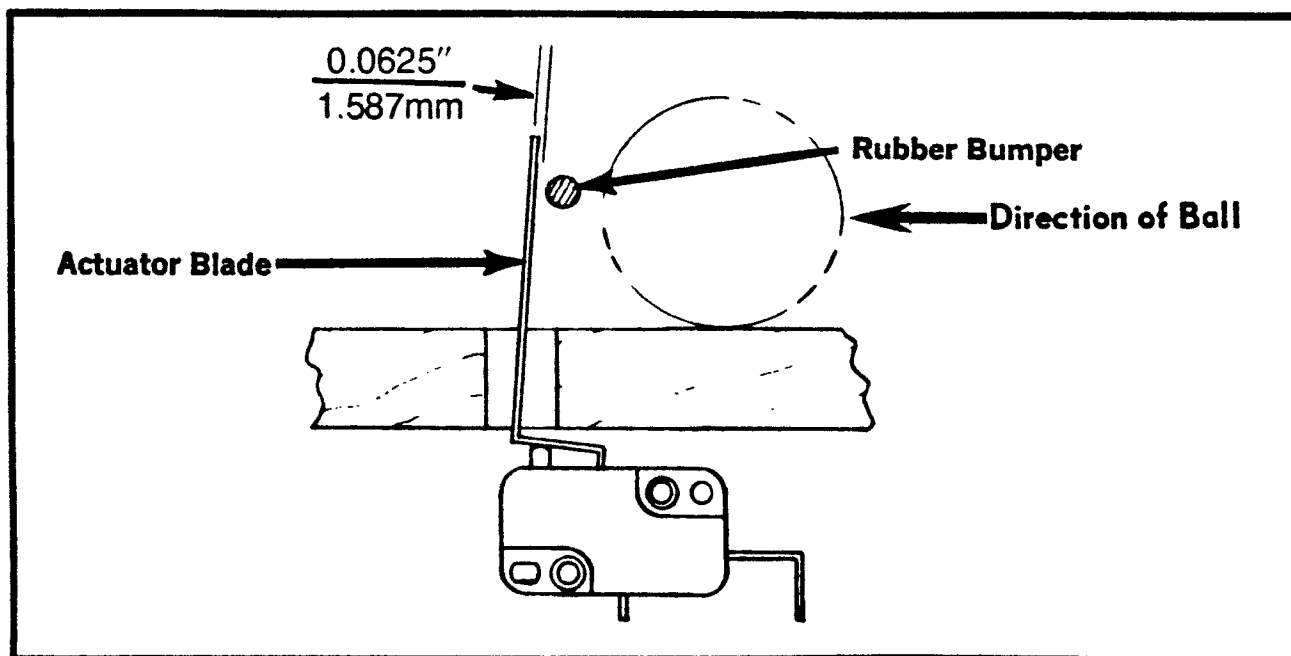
Sling shot and side rubber switch adjustment. Adjust the actuator so that the switch trips within the limits shown.
